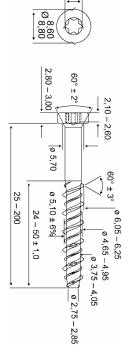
Milletech Itech 4.8 T25 for fixing in steel sheets
